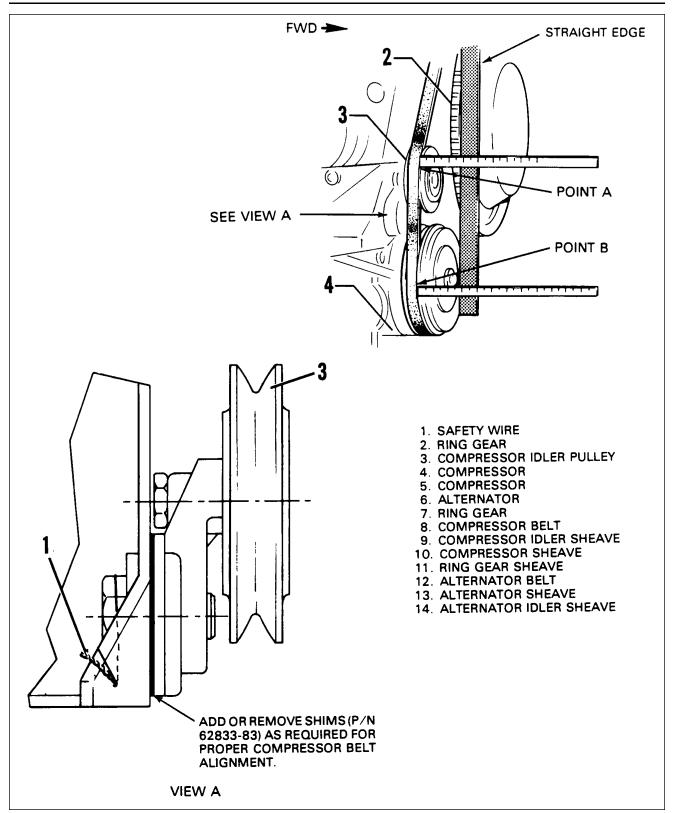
Compressor and Alternator Belt Installation (Sheet 1 of 2)
